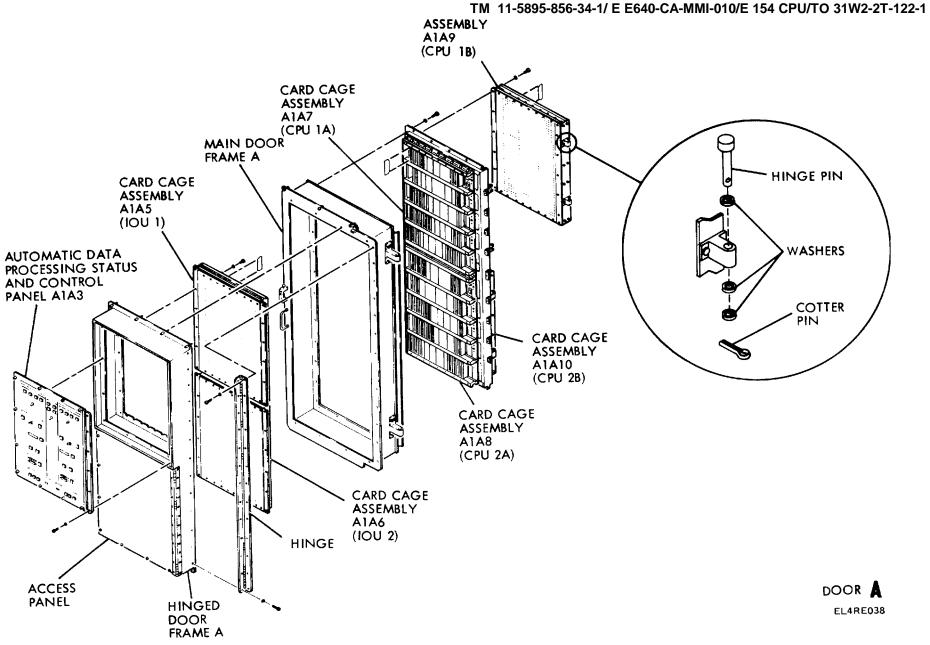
Message Switch ADP Assembly (Sheet 1 of 5).
